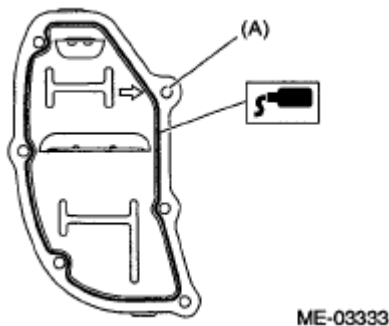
Applying Liquid Gasket To Mating Surfaces Of Oil Separator Cover And Threaded Portion Of Bolt
